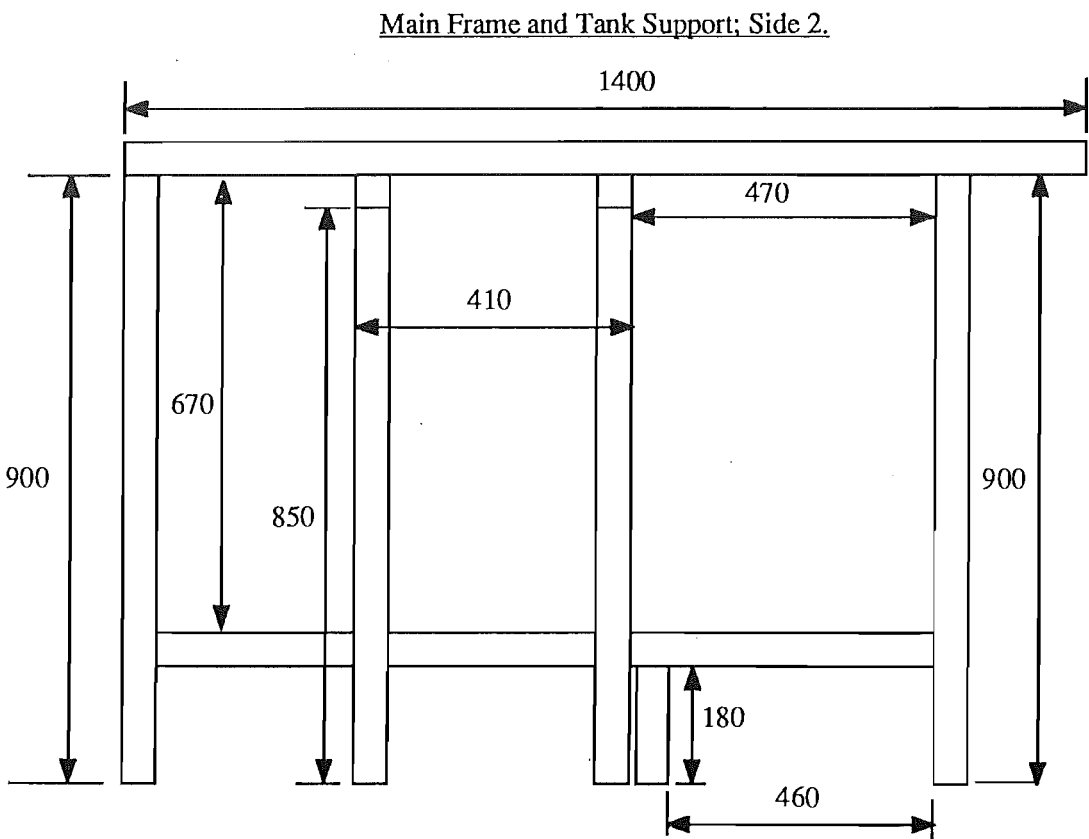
Workshop Drawing of Support Frame (Elevation 2)
